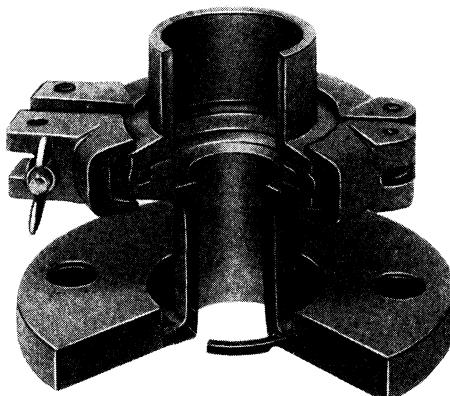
Cross section through an O-ring seal (*Courtesy of Heraeus⁵⁴²*)
